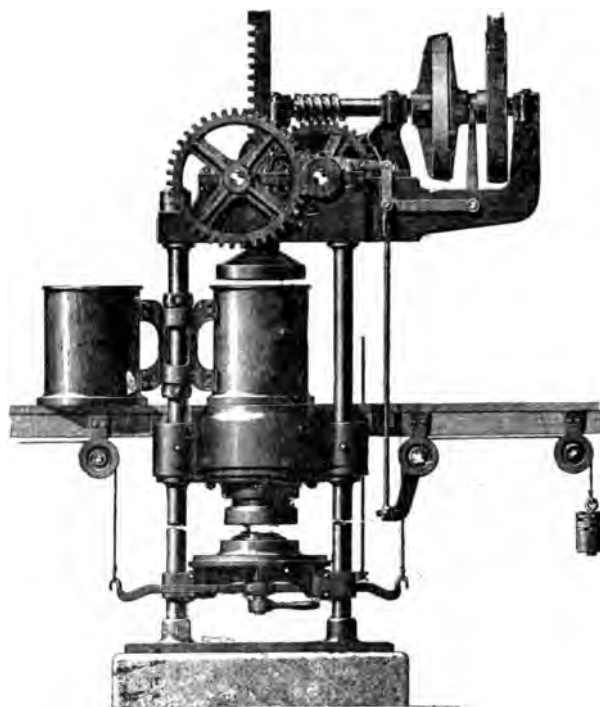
Piston Machine, worked by Steam (Chambrette-Belon).
